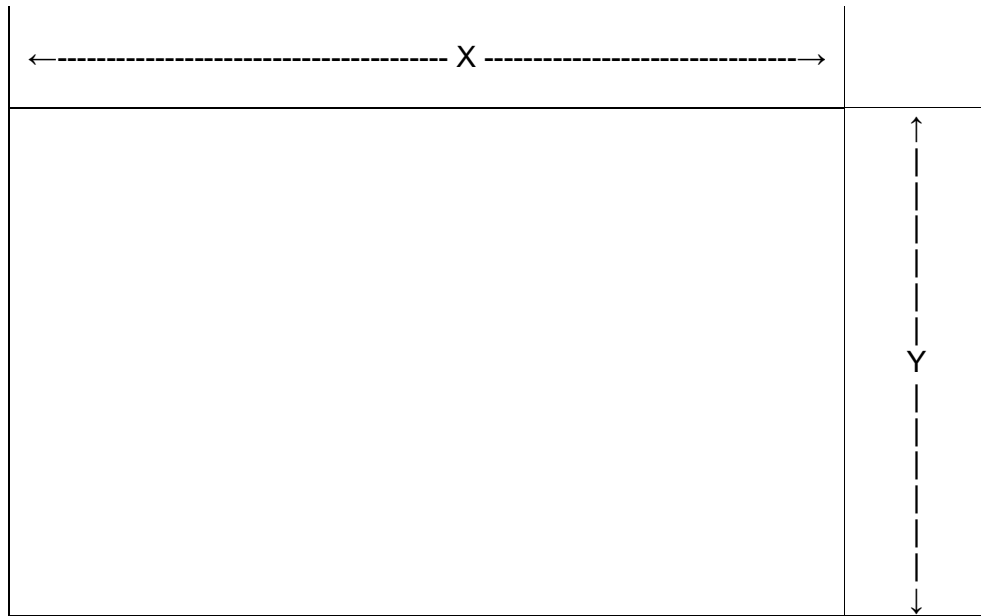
SYSTEM ENCLOSURE MOUNTING PATTERN
